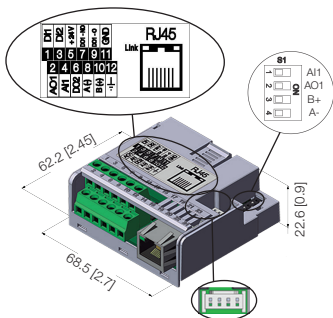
Ethernet dimensions in mm [in], DIP-switches location and MCard connector
